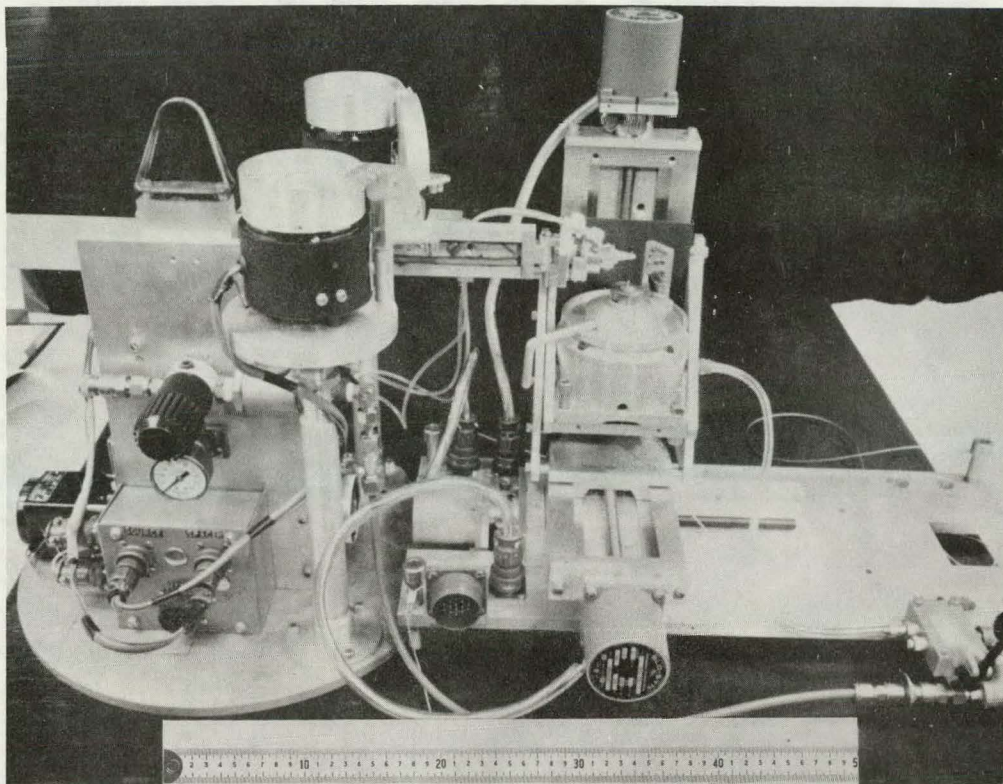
Stacking and Transfer Machine Operation With Positioner
